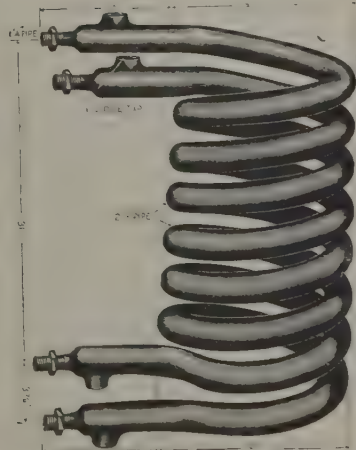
Gold Double Duplex Coil with Welded Ends; 2 1/2 in., No 609A.
